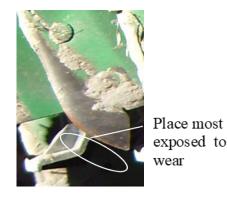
Coulter flap fixed in agriculture machine with place most exposed to wear marked.
